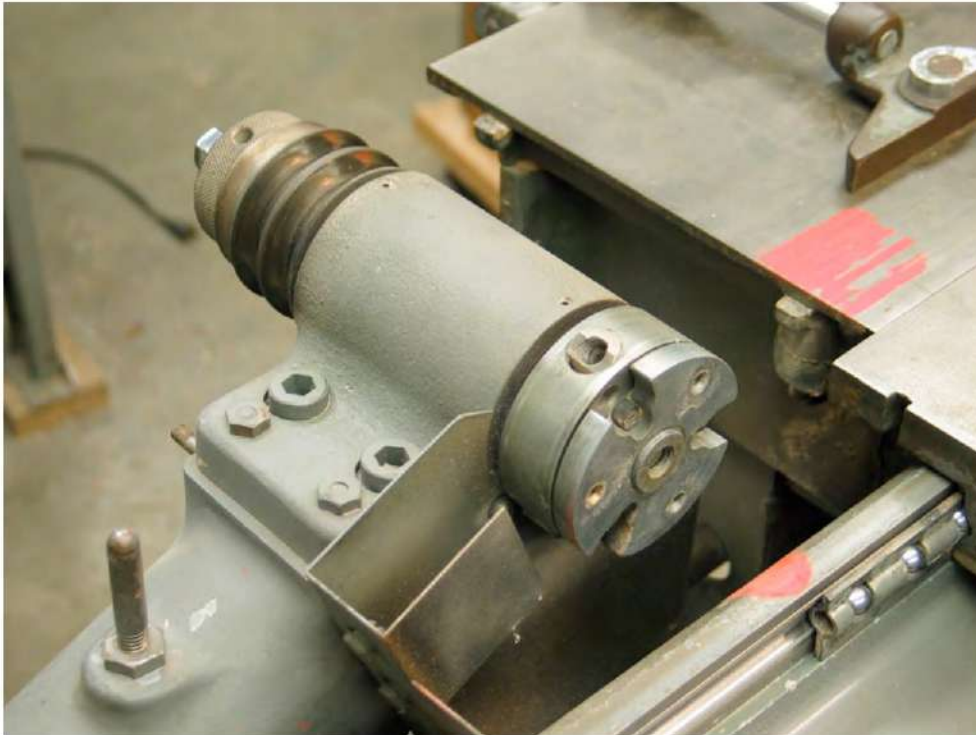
blade side of original arbor. Note sheet metal dust deflector. This will be
